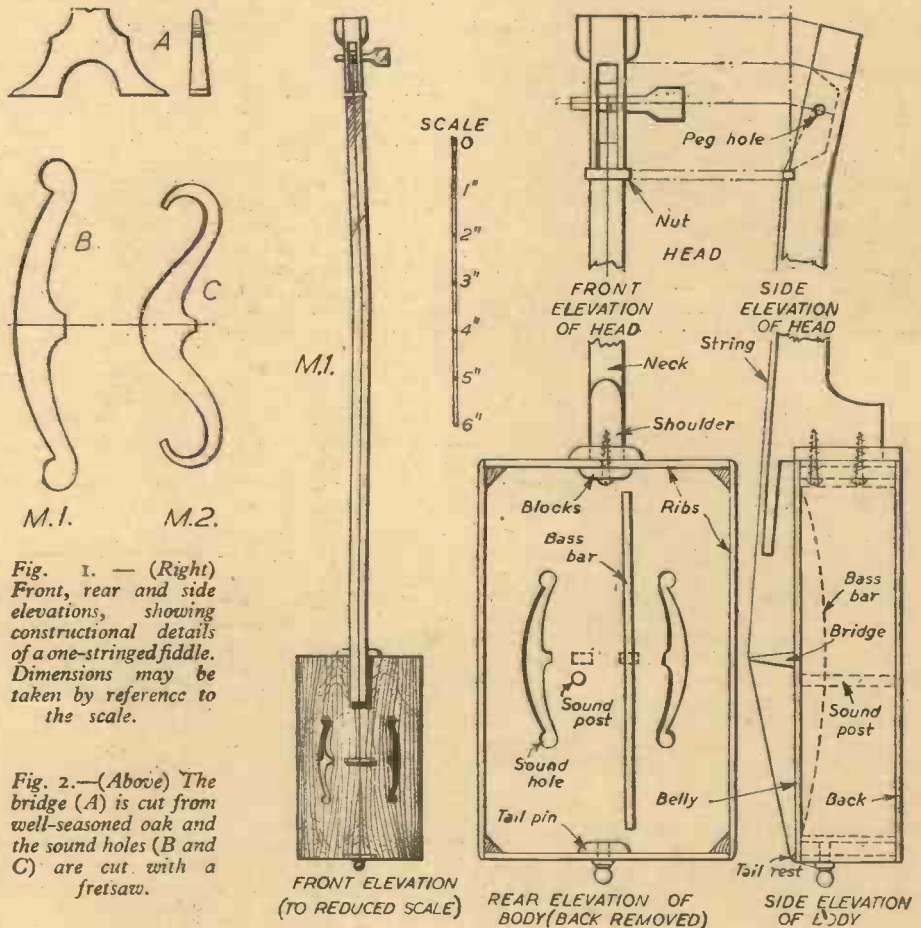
(Right) Front, rear and side elevations, showing constructional details of a one-stringed fiddle. Dimensions may be taken by reference to the scale.
